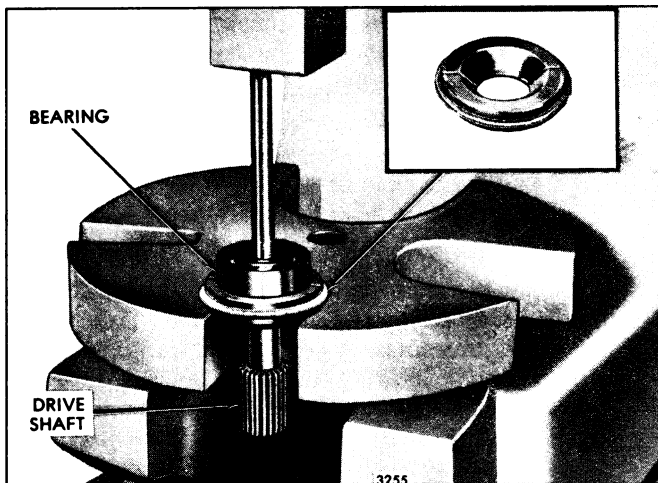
Removing Bearing from Drive Gear with Tool J 4685
